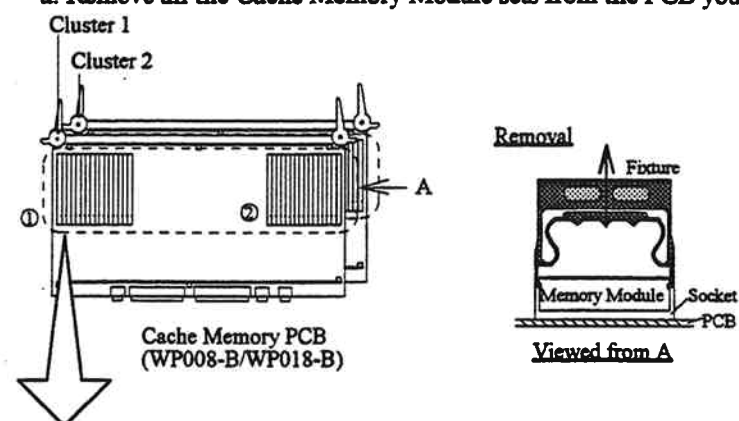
Removal of the Cache Memory PCB
